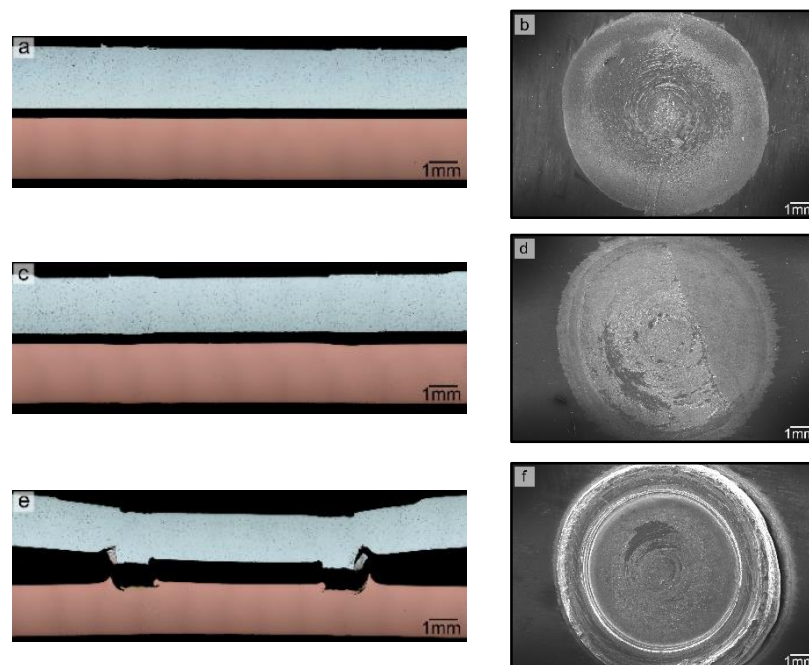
Cross section of a tested lap-shear specimen and the respective aluminum fracture surface: (a) and (b) through the interface fracture mode (weld condition: 1200 rpm, 1.6 mm, 0); (c) and (d) transitional fracture mode (weld condition: 2000 rpm, 1.8 mm, 0); (e) and (f) plug pullout with tearing (weld condition: 1500 rpm, 2 mm, 2 s).
